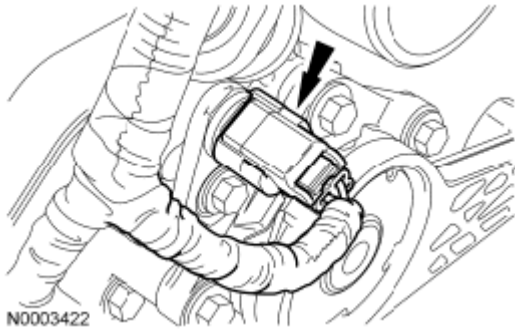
Locating RH Camshaft Position Sensor Electrical Connector
